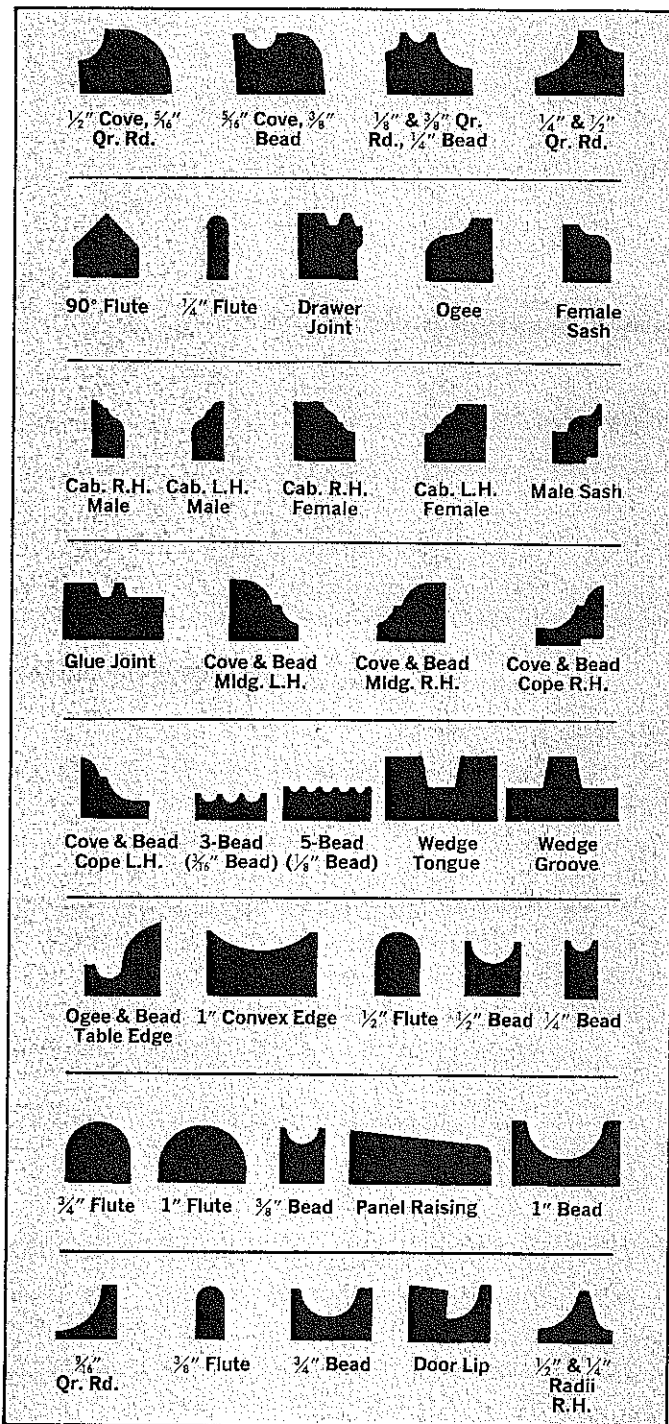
Typical shapes, 3-lip shaper cutters. Cutters are shown half size. (Delta International Machinery Corp.)
